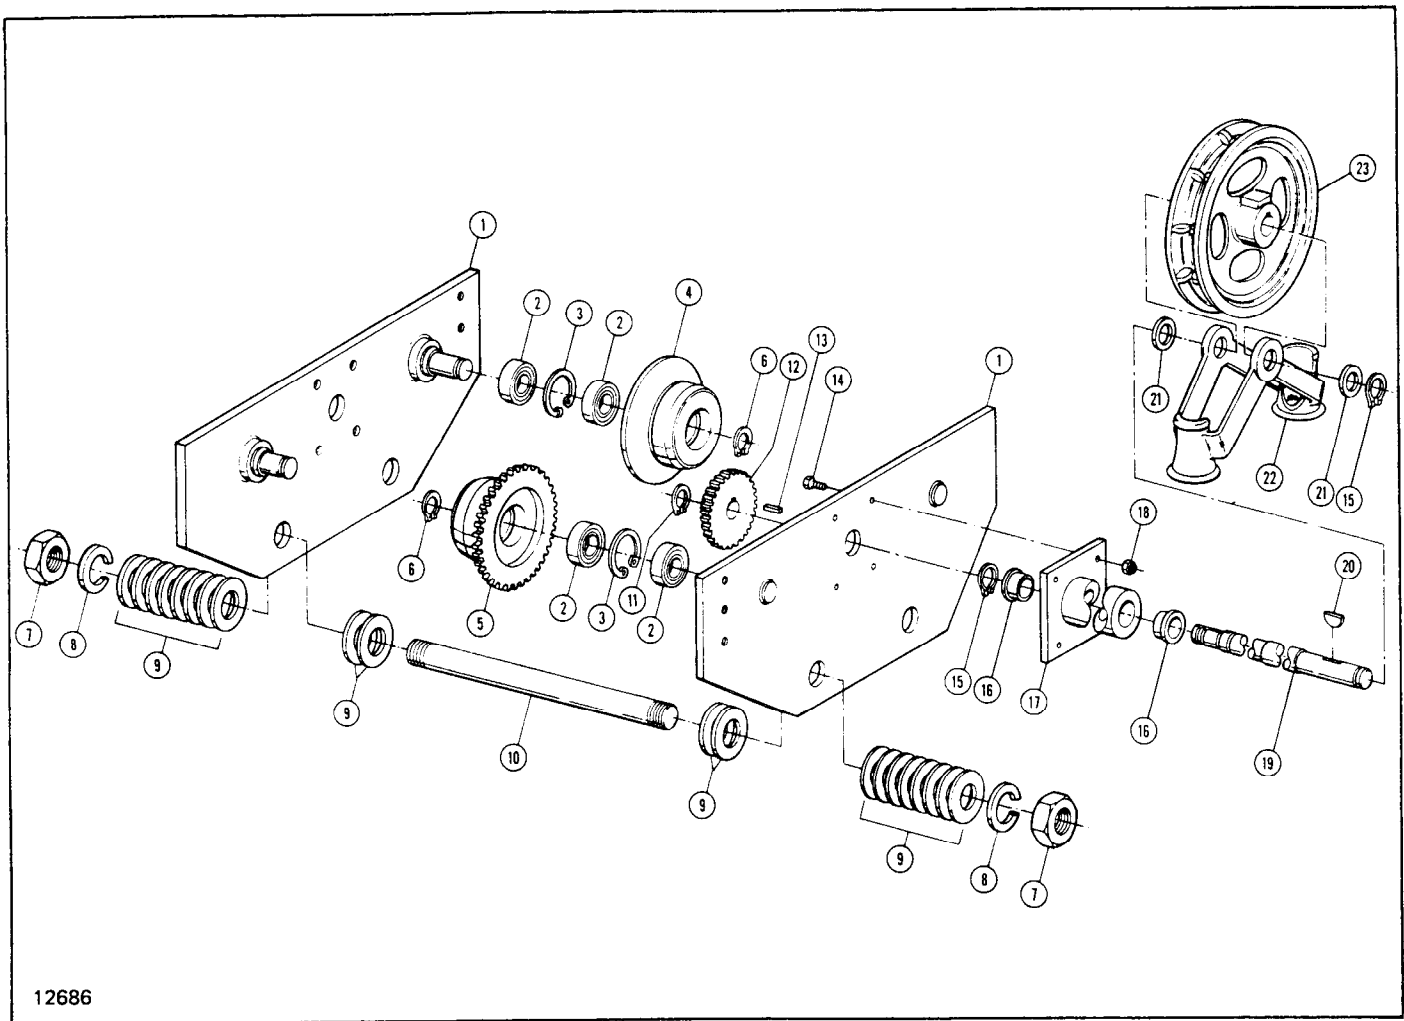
Hand Geared Rigid Mount Trolley Assembly.
